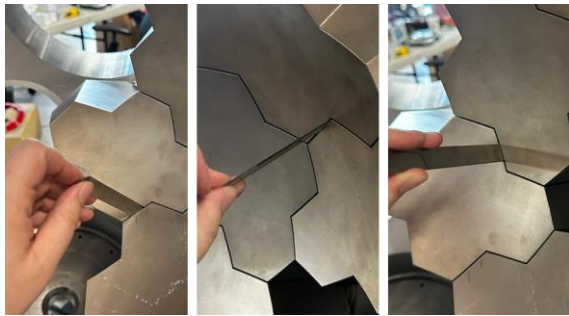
Secondary measurement using feeler gauges to check the gap between QDM end caps.
